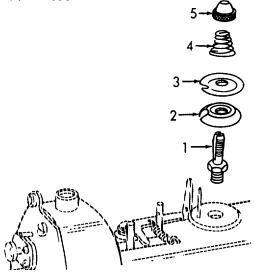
Rear Thread Tensioner and Thread Guide, Installation.
